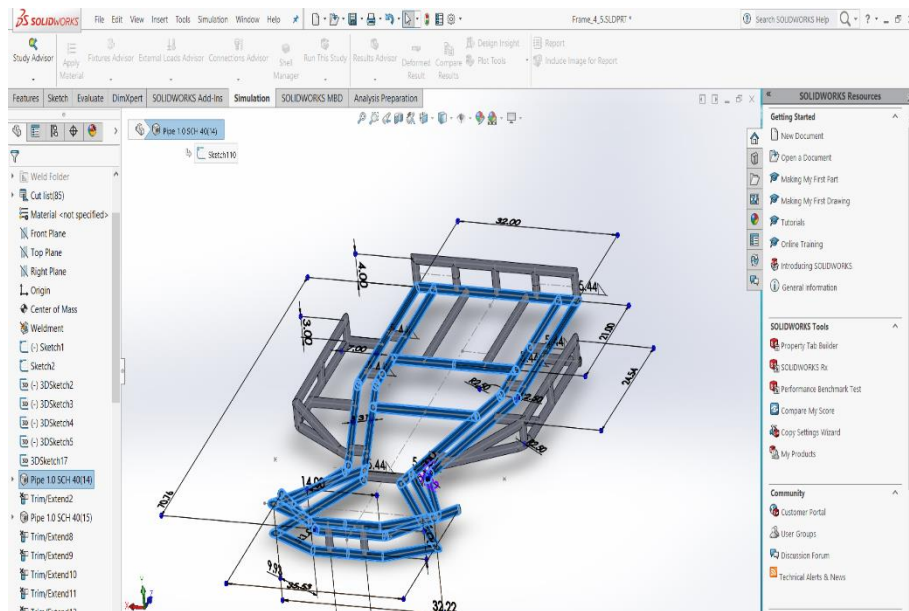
(e) - Modelling of the second frame (Dimension-V)
